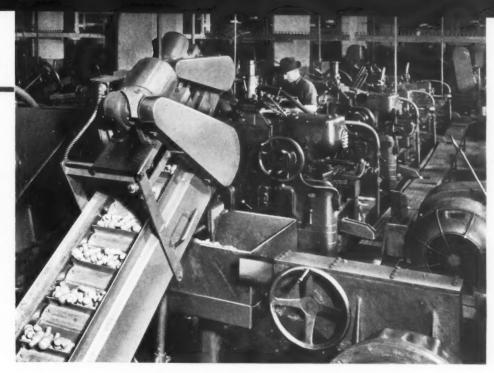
From a Hopper of an Automatic Feeding Attachment the Parts Pass through a Centerless Grinding Machine at a Production Rate of Forty Valve Guide Bushings per Minute
